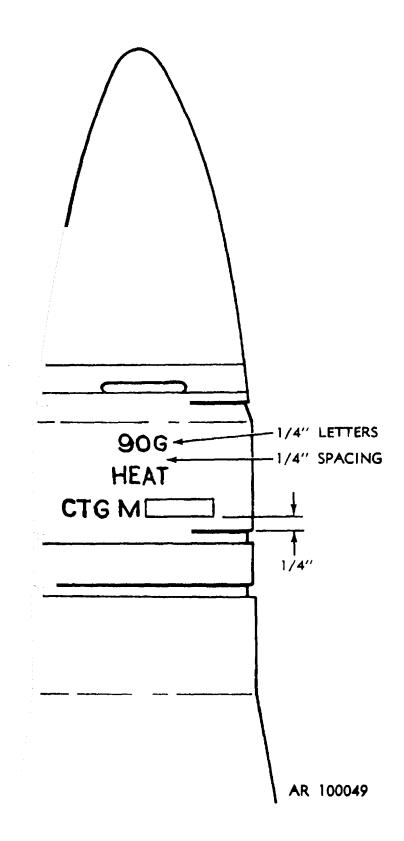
Typical marking for 90mm gun cartridge M348A1.
